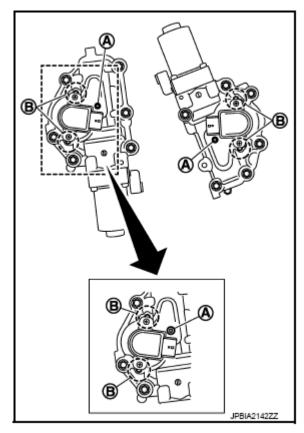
Locating VVEL Control Shaft Position Sensor And Upper Housing Matching Marks
